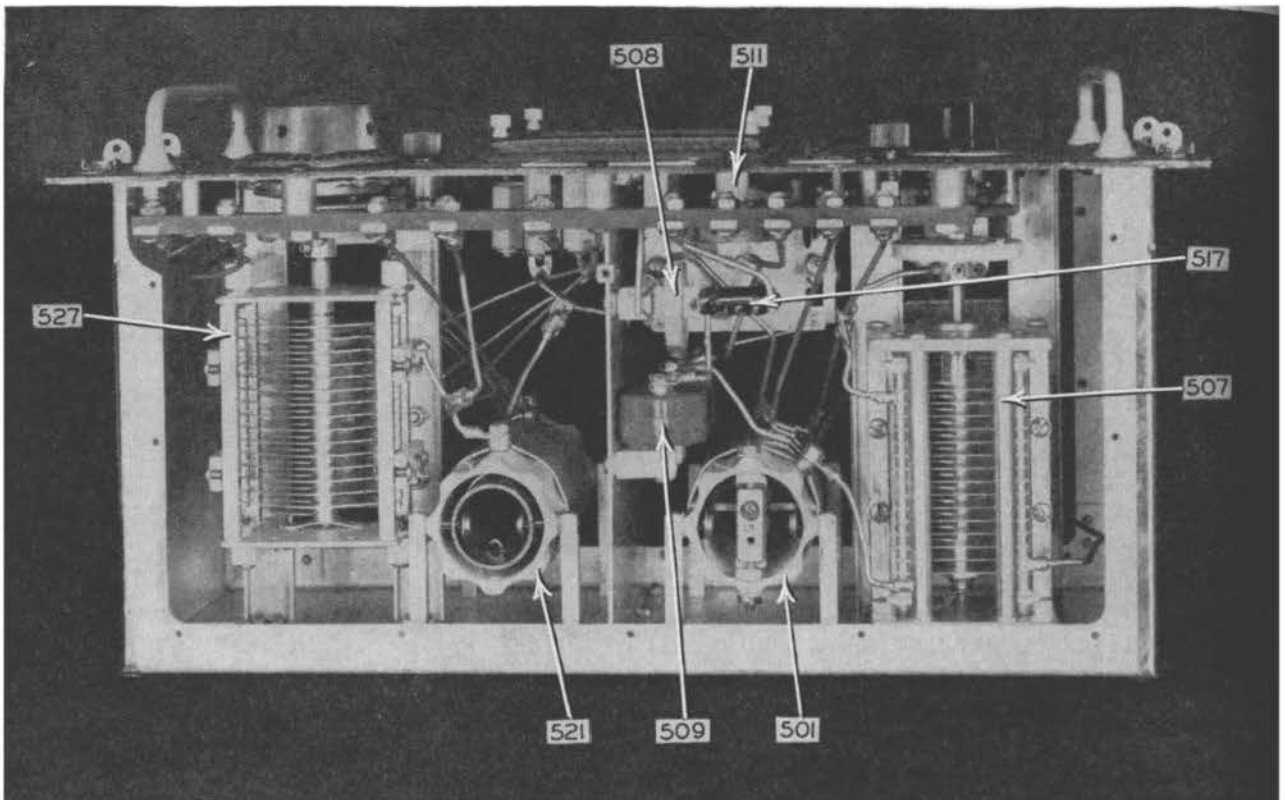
Transmitter Tuning Unit TU-5-B, Top View, Cover Removed
